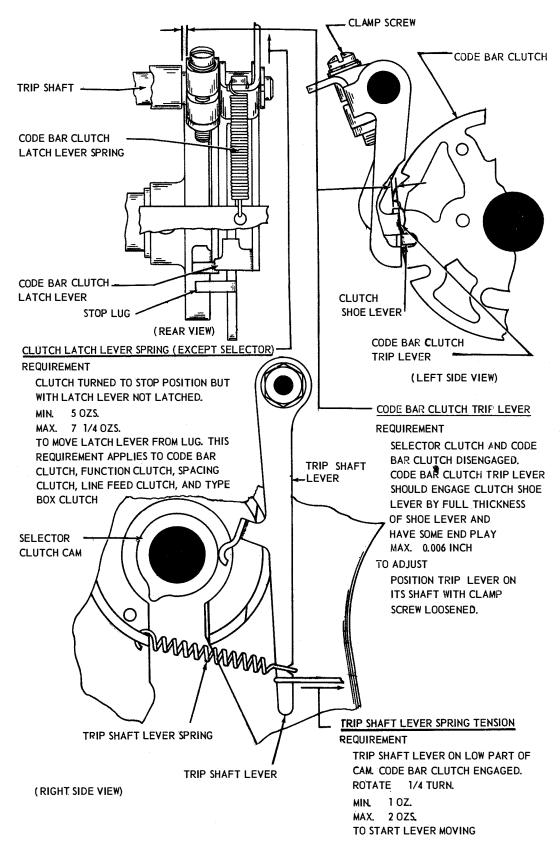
TYPING UNIT, CODE BAR CLUTCH TRIP SHAFT MECHANISM
